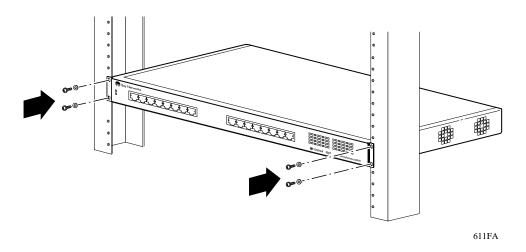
Installing the BayStack 350 switch in a 19-inch rack
